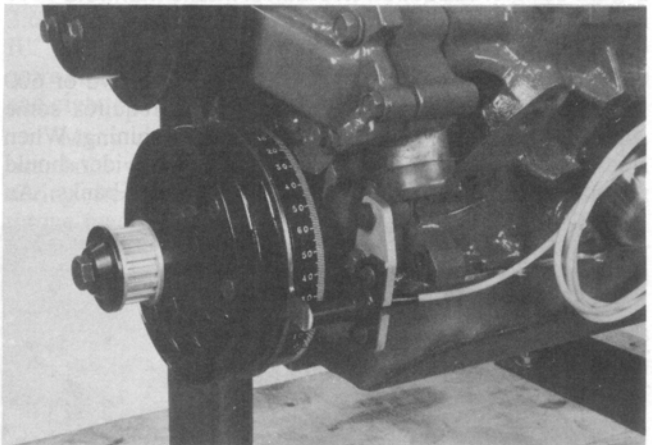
Crankshaft trigger wheel and magnetic sensor provide reference signals for electronic fuel injection.
